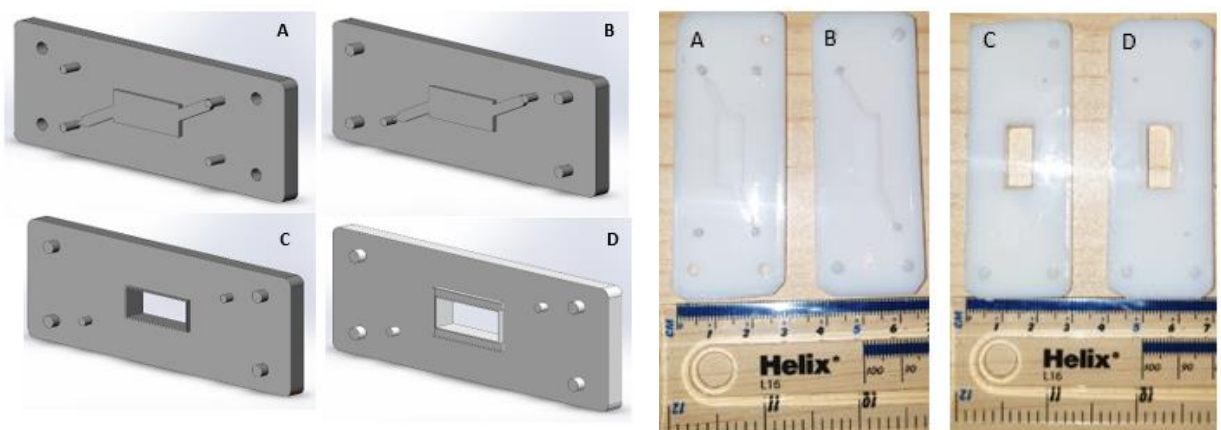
Presents the SolidWorks and 3D printed moulds for the VOC platform (A) Top VOC mould; (B) Base VOC mould; (C) Central top mould and (D) Central base mould.
